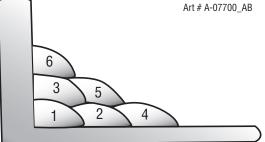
Multi-runs in HV Fillet Weld
